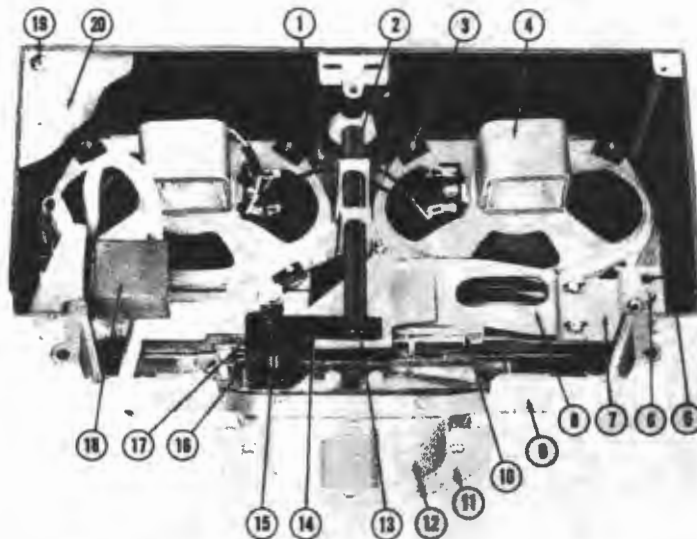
TOP CASTING ASSEMBLY, 5220-5225
